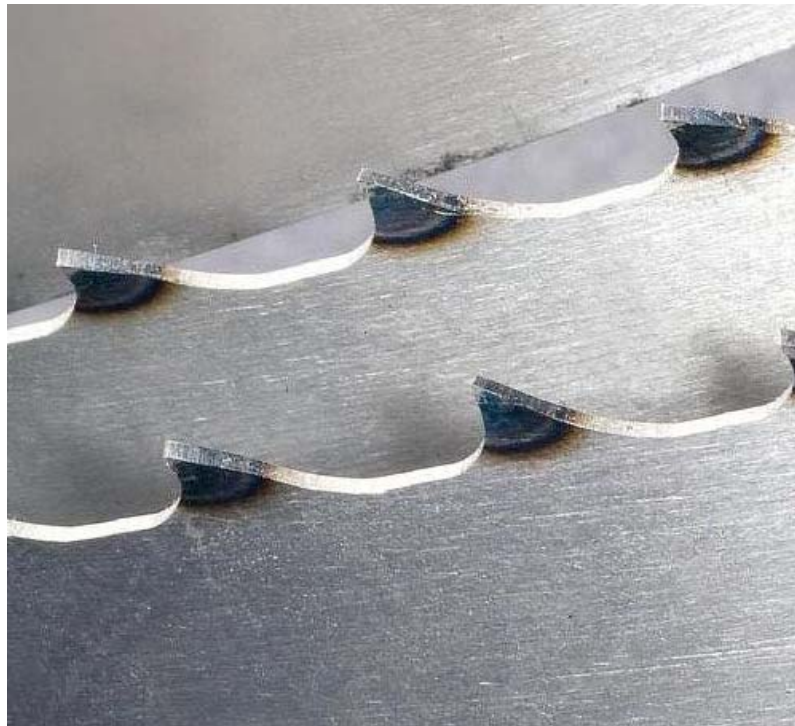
Electron beam welded composite steel bandsaw blades.
